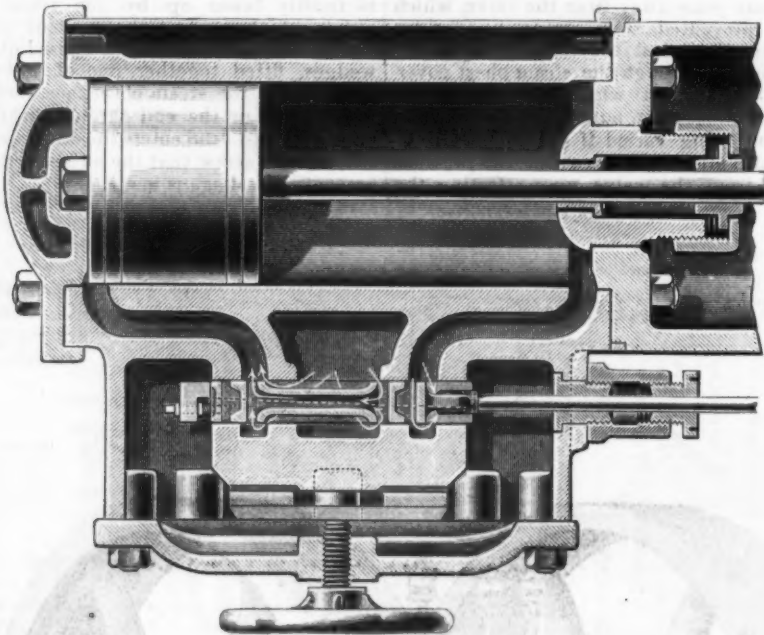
Sectional Plan through Cylinder and Steam Chest.
